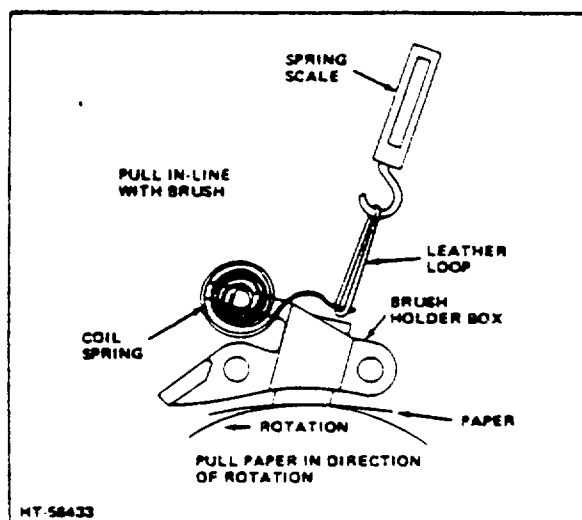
Method of Checking Brush Spring for Proper Pressure
